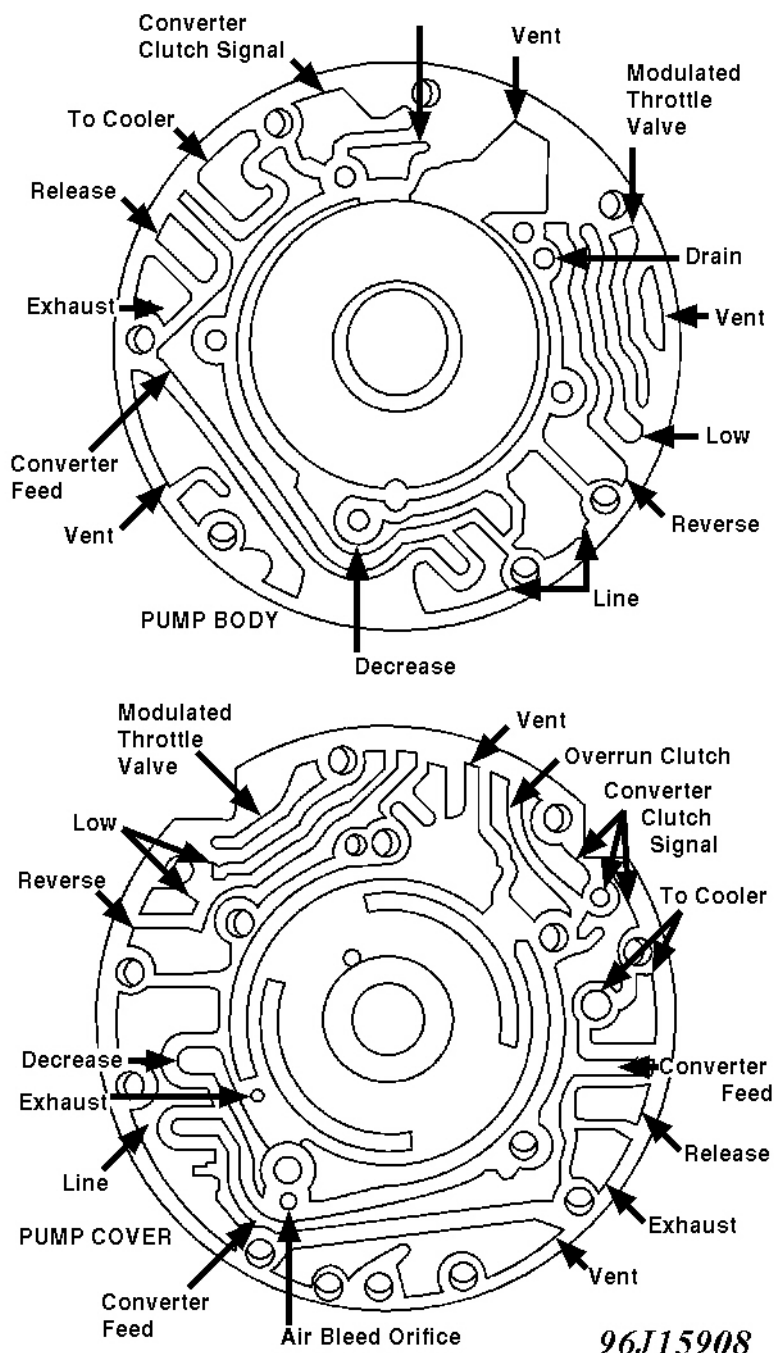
View of Pump Cover & Body Showing Hydraulic Passages
